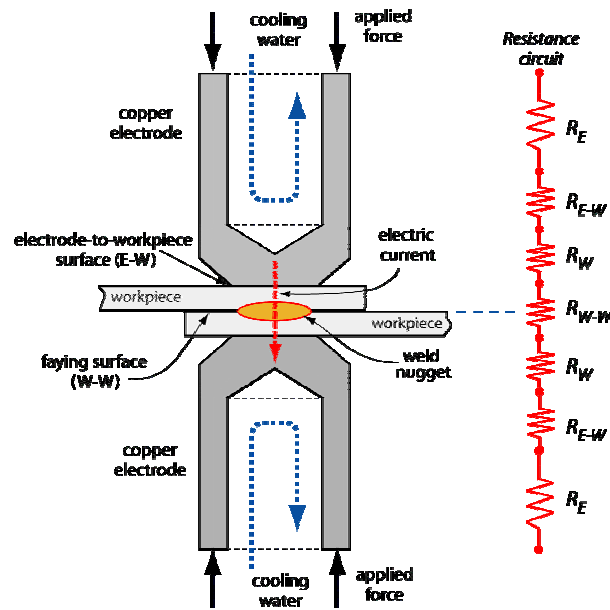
Schematic representation of resistance spot welding setup and its corresponding electrical resistance circuit. (Note: E : Electrode; W : Workpiece; $E-W$: Electrode-to-workpiece; $W-W$: Workpiece-to-workpiece or faying surface).
